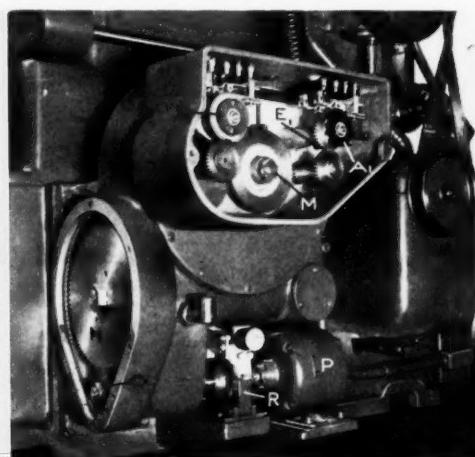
Detail View of the Automatic Work-elevating Mechanism and its Motor
